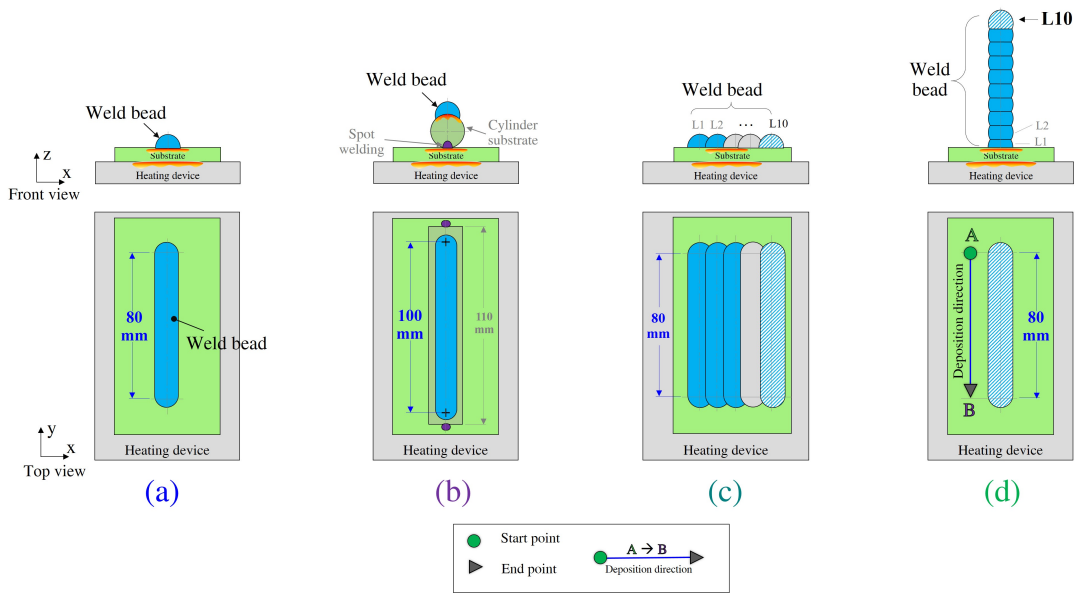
Design of experiment: (a) Single weld bead on flat substrate, (b) Single weld bead on cylinder substrate (c) Lateral overlap weld bead and (d) Vertical overlap weld bead
